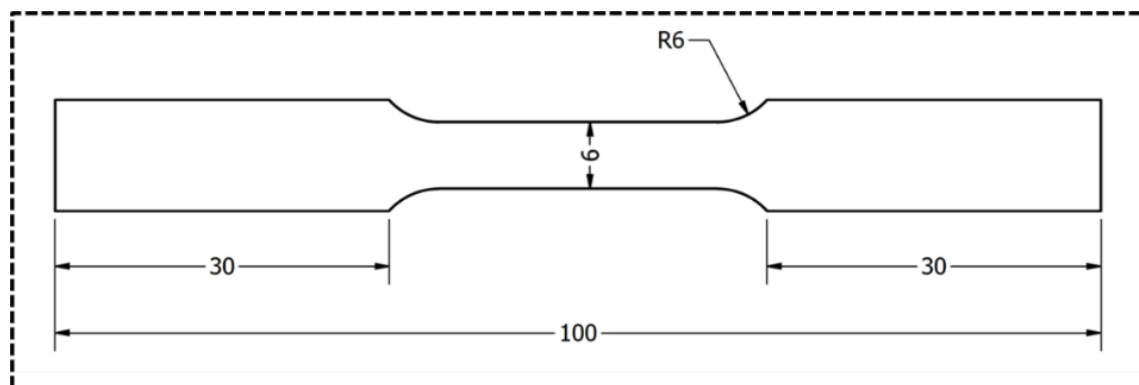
Dimensions of the extracted tensile test specimens (ASTM E8, All dimensions in mm).
